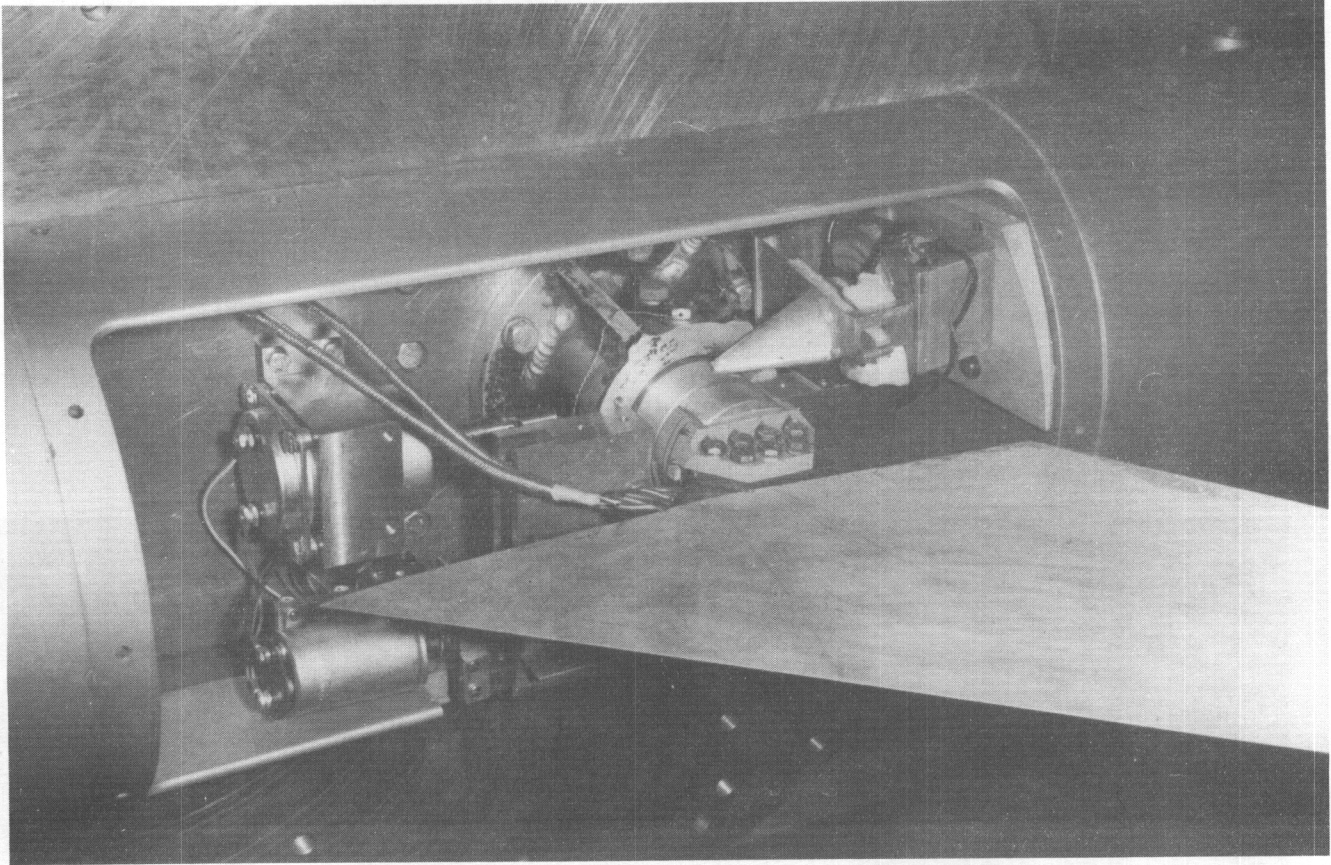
Closeup with fuselage cover plate removed. Stabilizer root fitting is shown bolted to the torque tube which in turn is supported by the welded hub assembly through flexure pivots. The torque tube extends through the wall and is attached to a torsion spring as shown in Figure 23. The solenoids at the left operate mechanisms for locking out the pitch degree of freedom.
